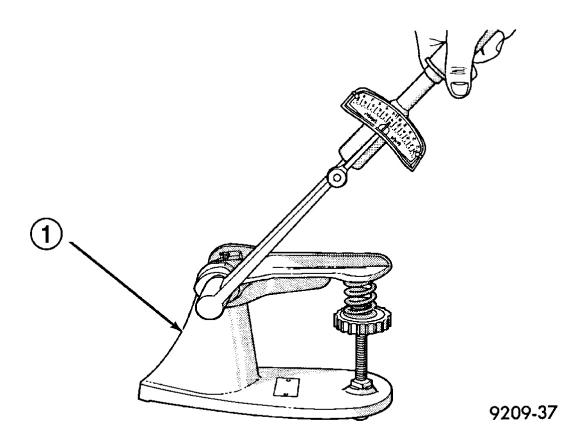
Testing Valve Spring Courtesy of CHRYSLER LLC
